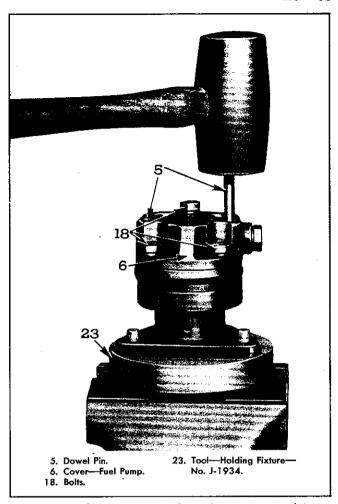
Replacing Pump Body and Cover in Fuel Pump While Holding Pump in Fixture—Tool J-1934.
